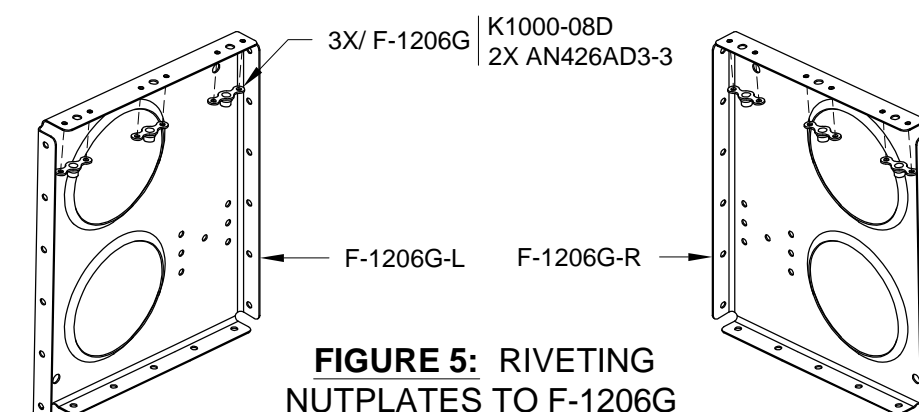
RIVETING NUTPLATES TO F-1206G
